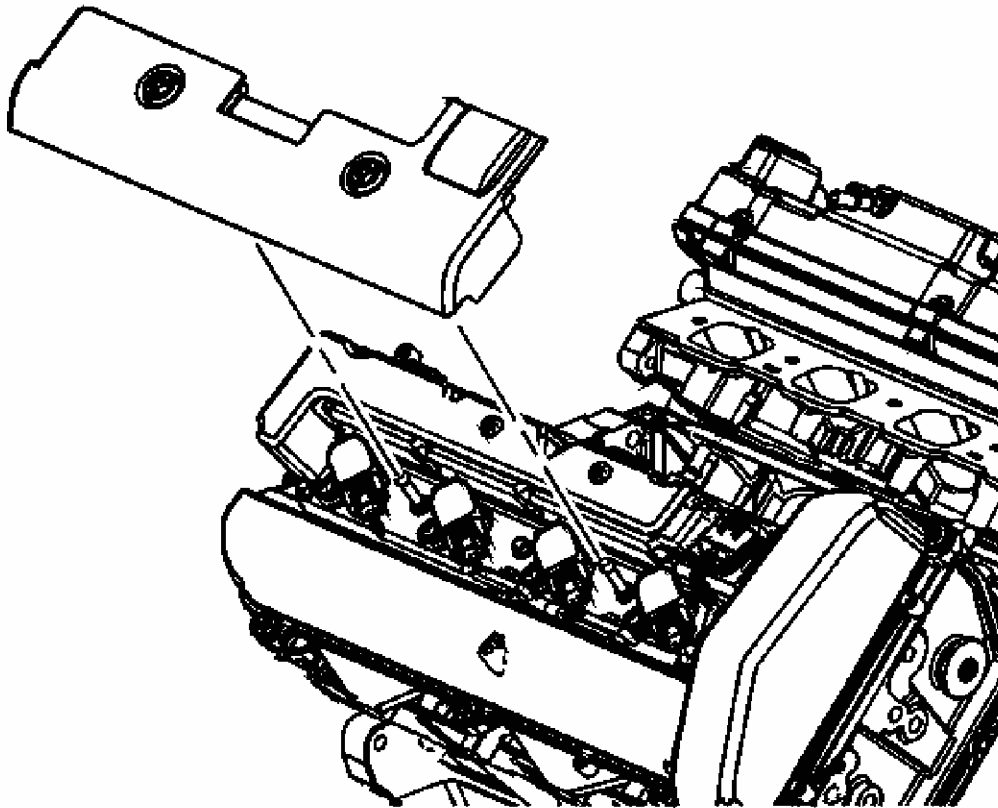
Identifying Ignition Coil Assembly Sight Shield Cover
